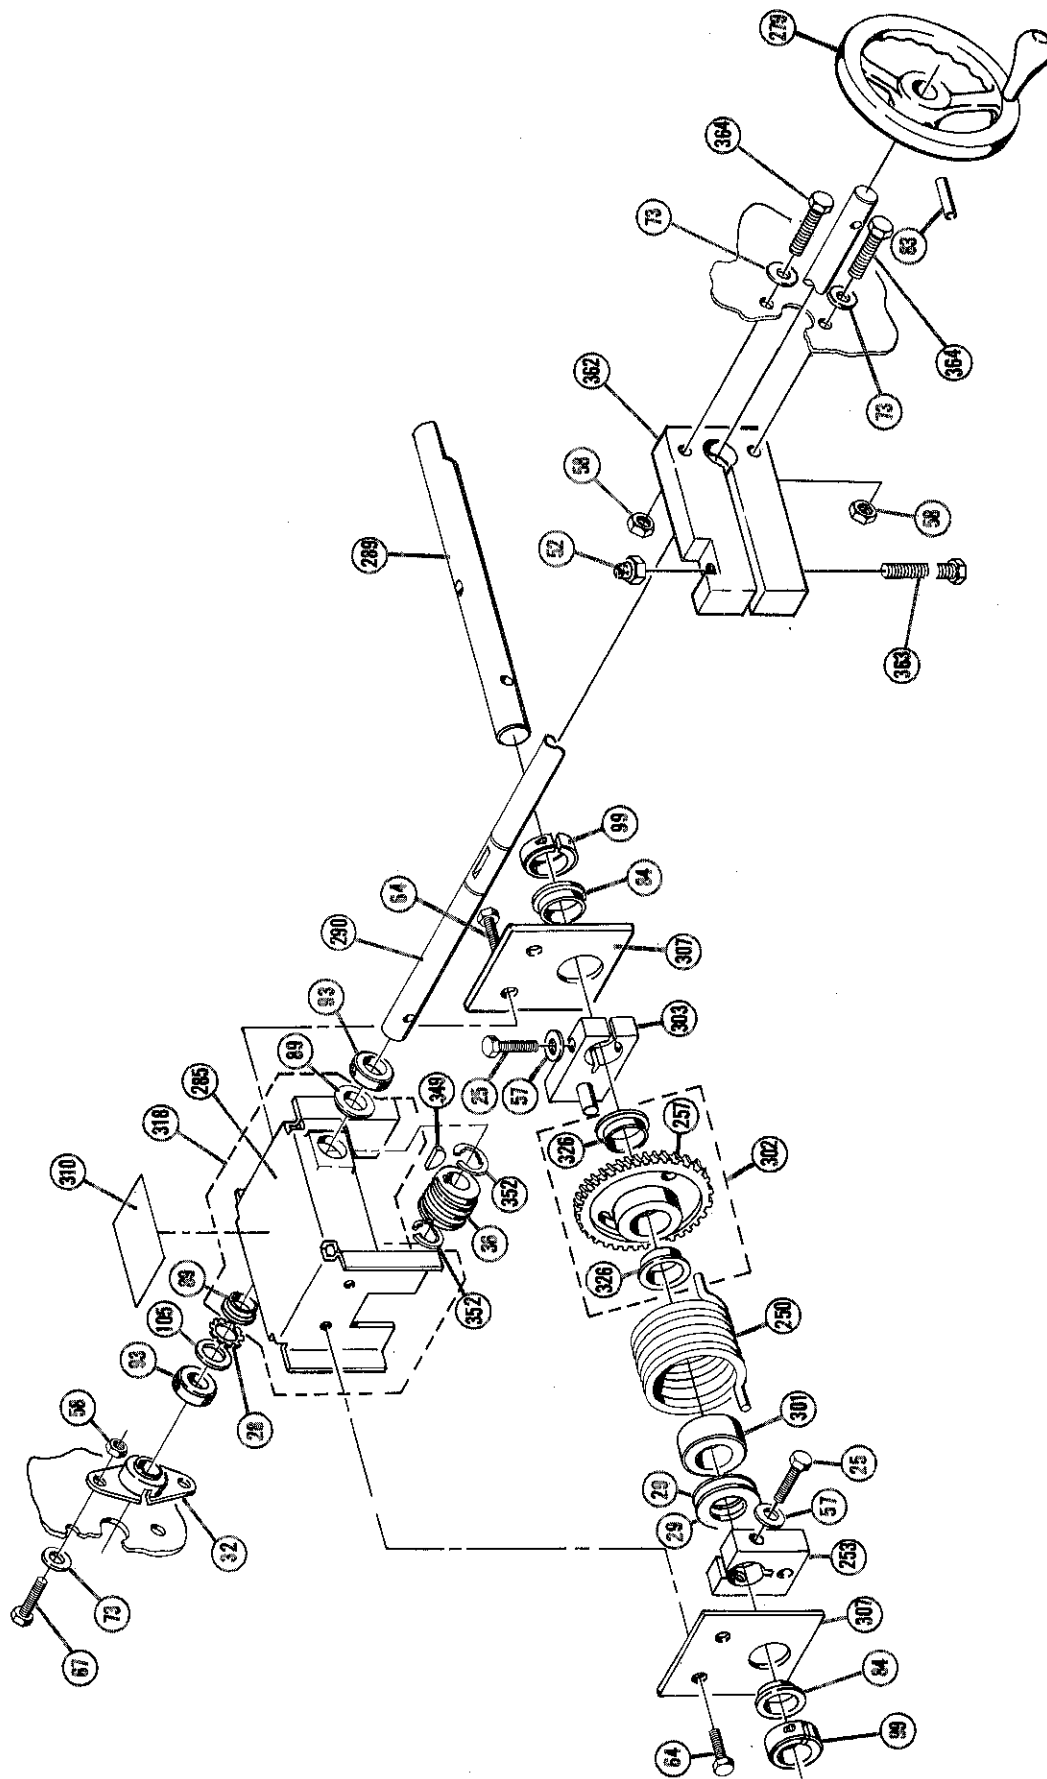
BOX WIDTH DRIVE ASSEMBLY
